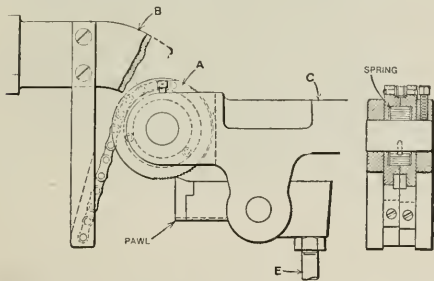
NEW HACK-SAWING MACHINE. GENERAL ARRANGEMENT SHOWING METHOD OF RELIEVING SAW DURING THE FORWARD, NON-CUTTING STROKE
